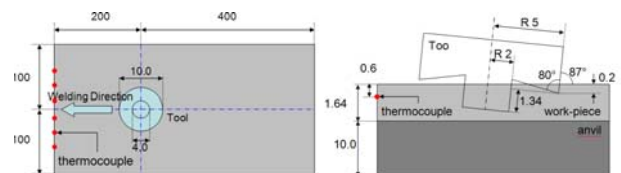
Dimensions of the thermo-mechanical model: top view and section view of the tool (in mm).
